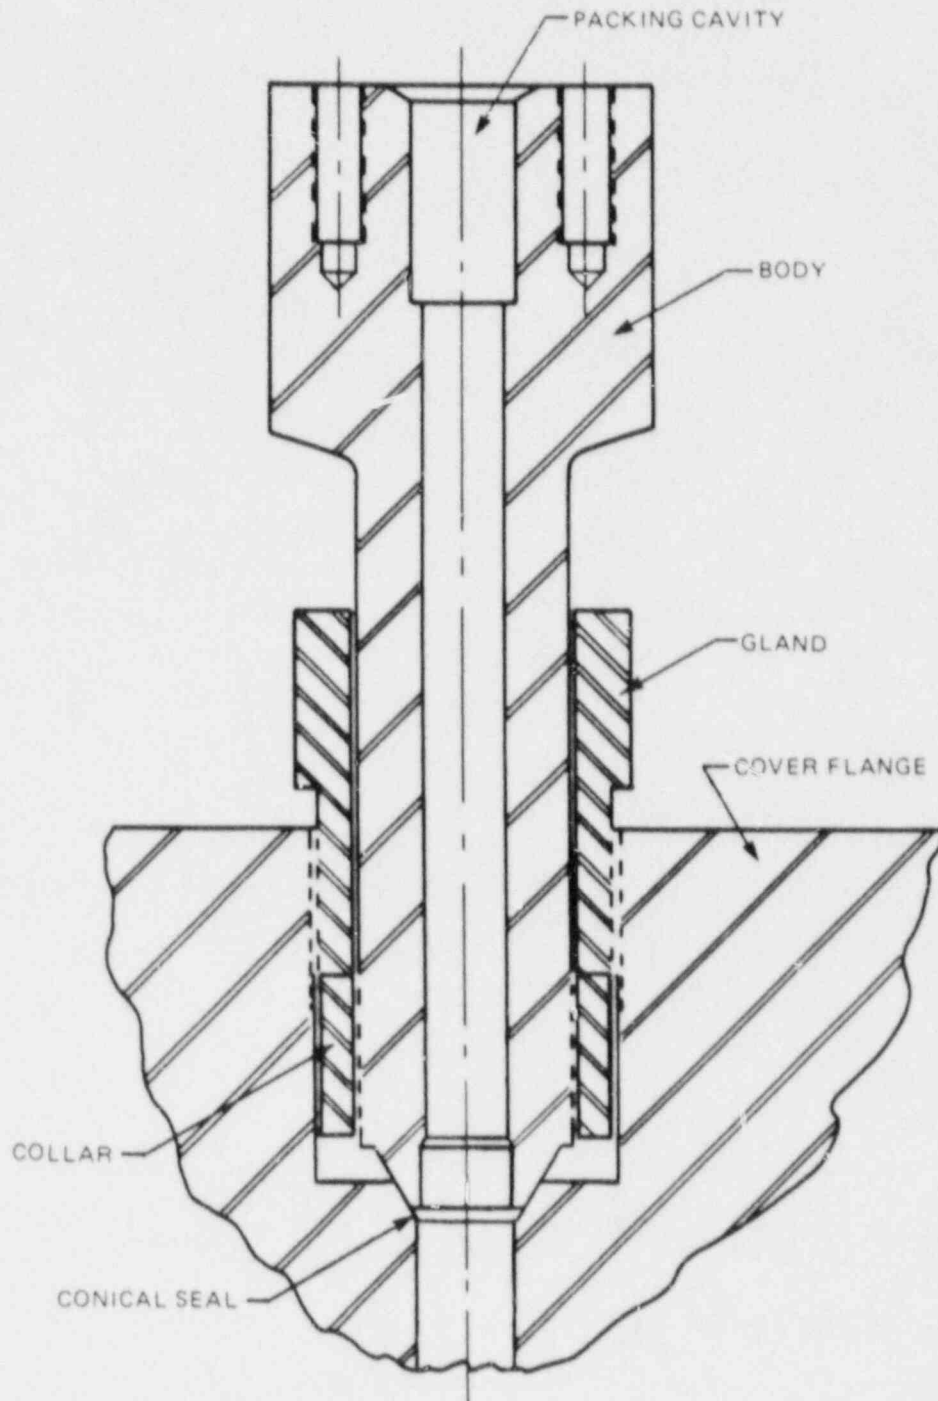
Cross section of conical seal in instrument lead penetration assembly in cover flange.
